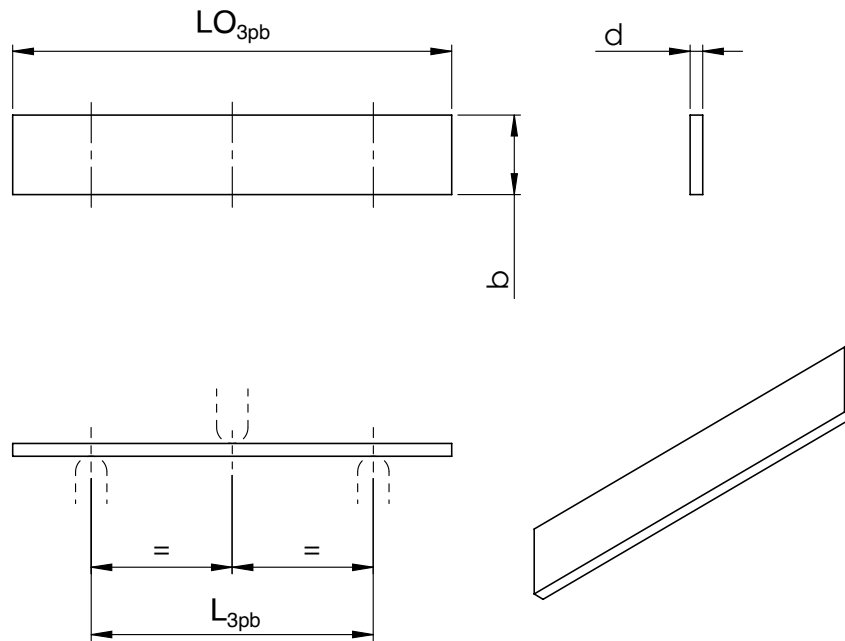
2D drawing of a 3-point bending test specimen.
